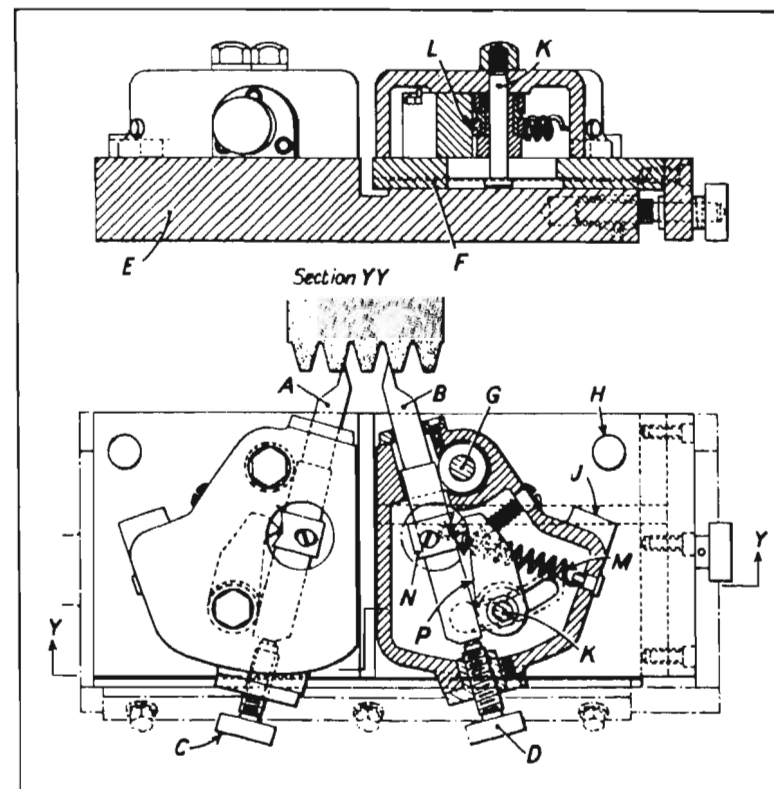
Attachment for diamond dressing a continuous helical rib on the abrasive wheel of a gear-grinding machine. By changing cam *N*, the wheel may be dressed to various profiles.
